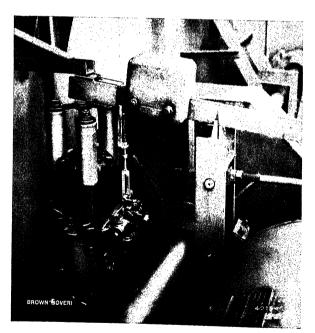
Electro-hydraulic thruster, with protection against dust and damping device which can be adjusted, mounted in the high-power hoisting mechanism.
